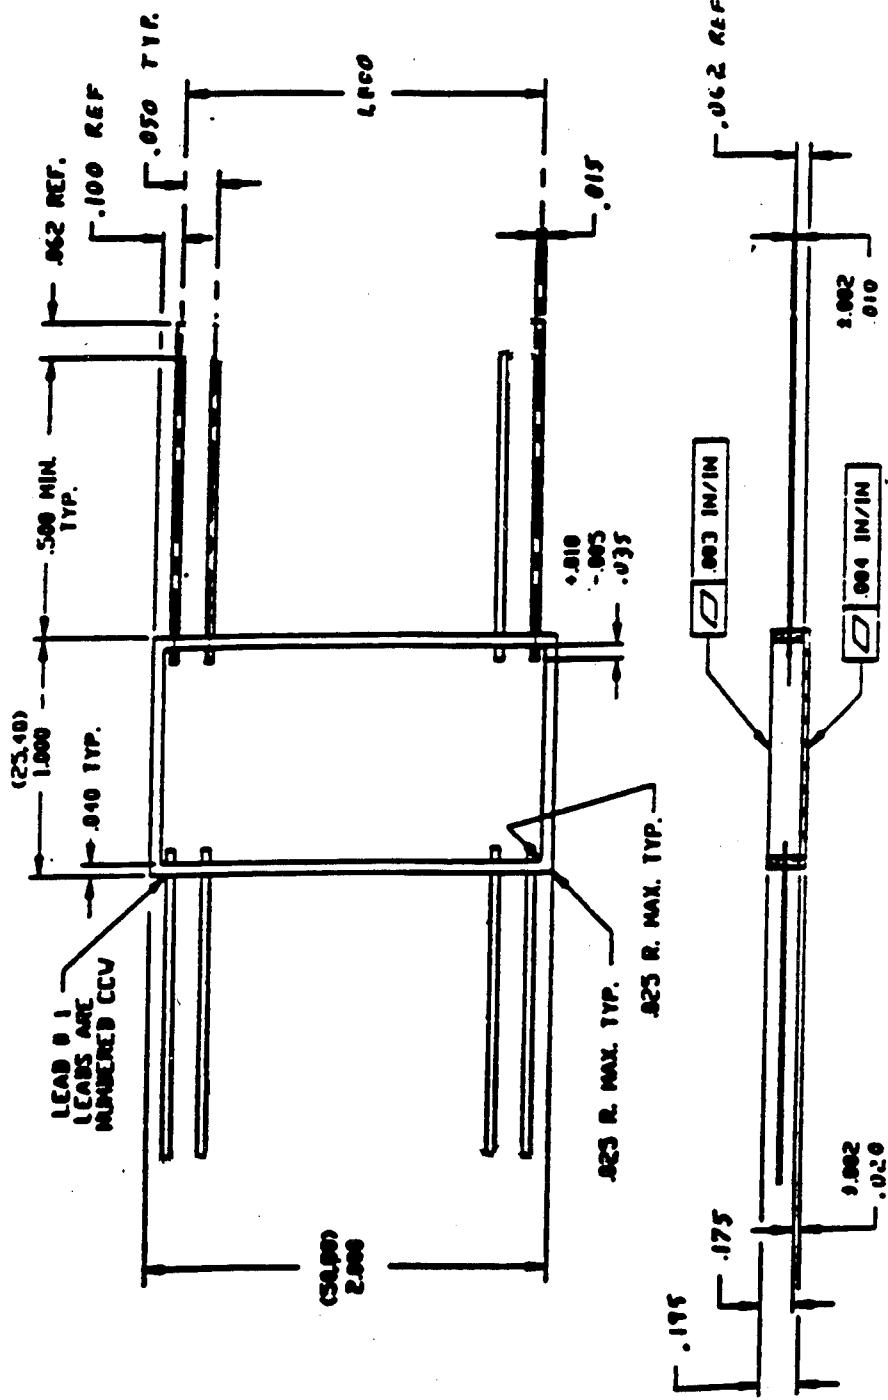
Micro TSMD-74 Pin Butterfly Lead Package
